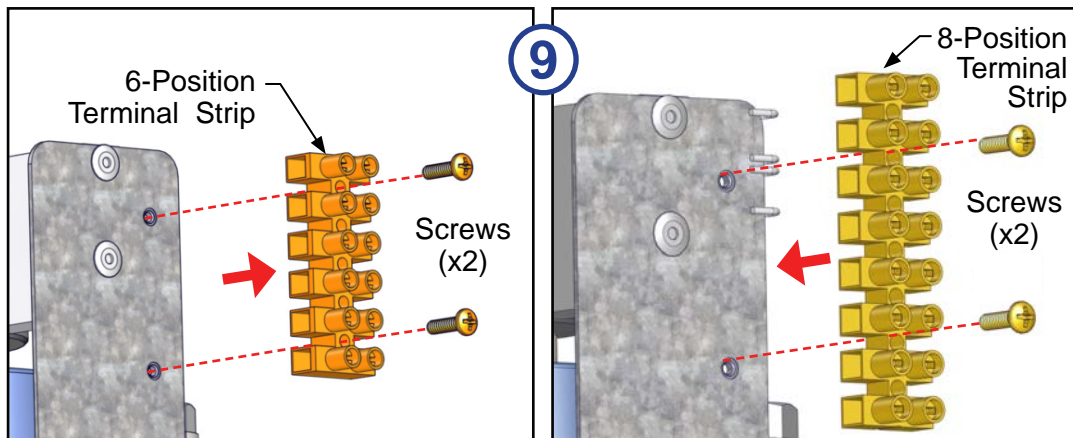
Replace 6-Position Terminal Strip with 8-Position
